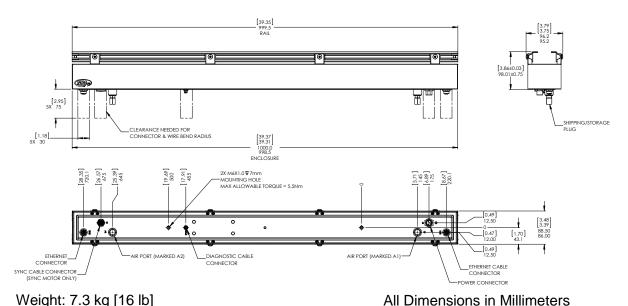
1000 mm Air-cooled Ethernet Motor Mechanical Drawing
